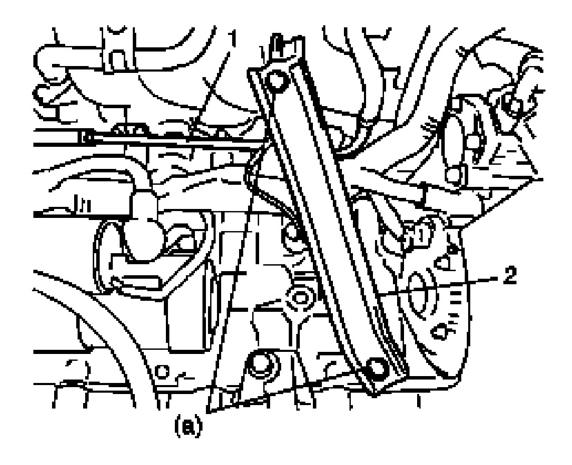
Installing Intake Manifold With Throttle Body Courtesy of SUZUKI OF AMERICA CORP.
